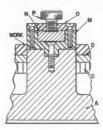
Section X-X showing bushing slide arrangement for indexing drill jig.
